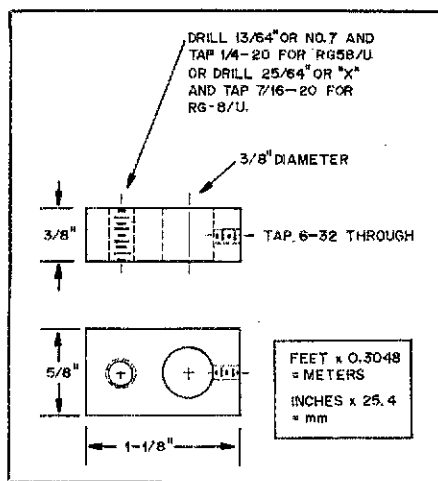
Detail drawing of the stub blocks used to connect and support and the quarter-wave sections.
